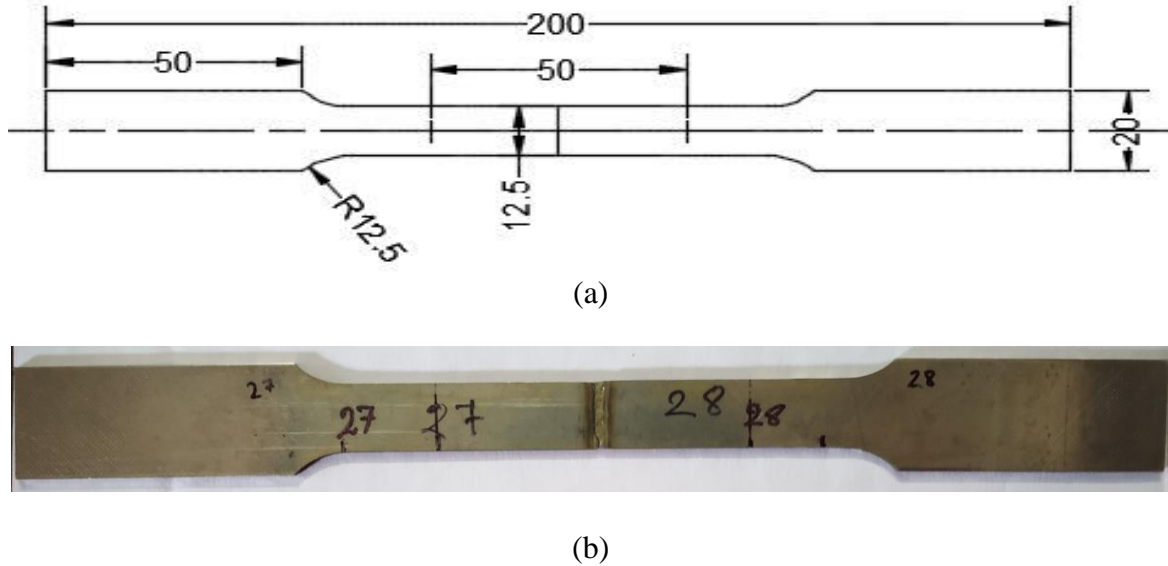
Tensile test sample (a) Dimensions (in mm) as per ASTM E8 standard, (b) Actual view of welded sample
